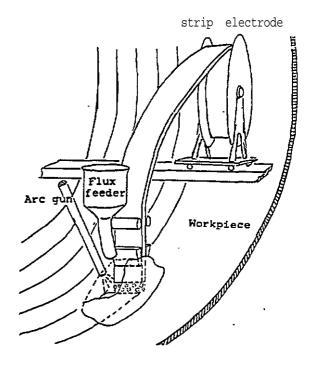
PZ welding operation using 150 mm wide stainless steel strip (6)
